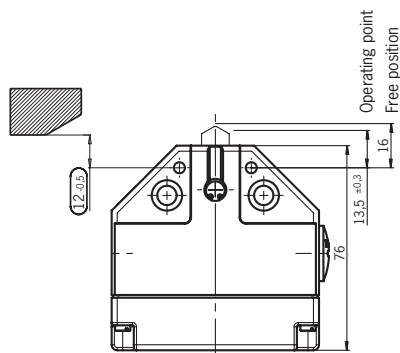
Dimension drawing for N1A.2588 (2 x ES588)
